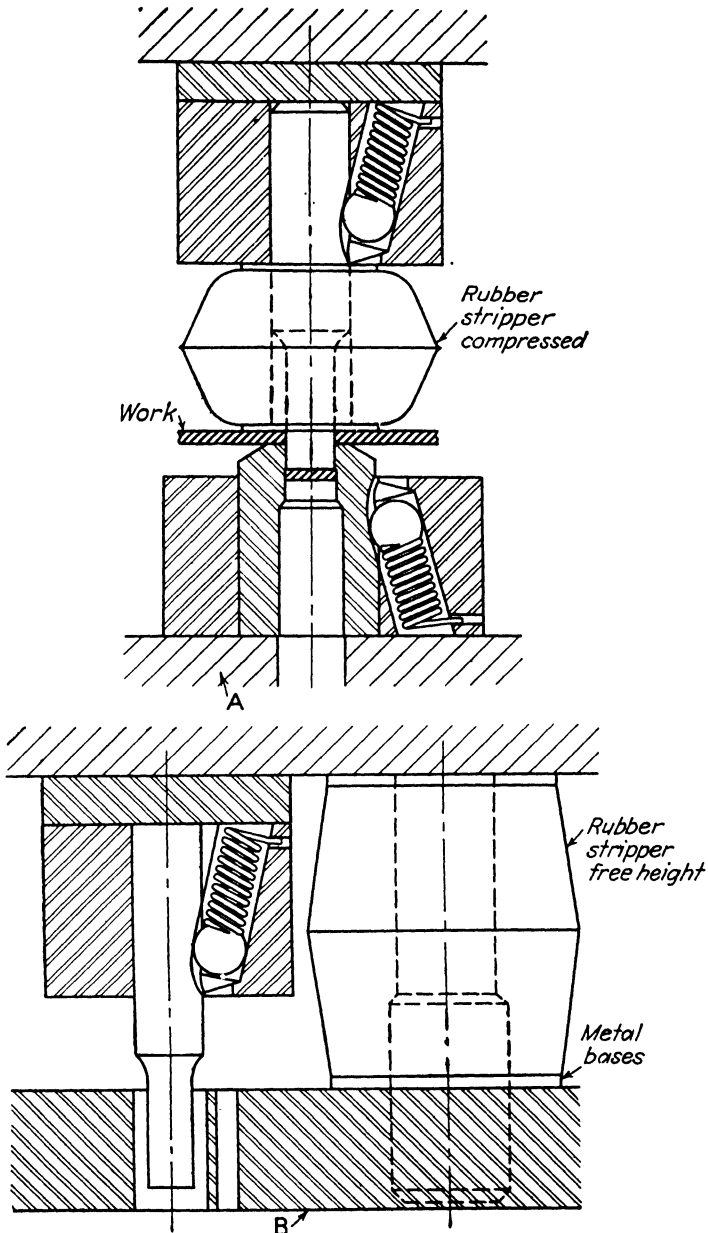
Rubber stripper shown at A eliminates the installing of a costly stripper plate, the mounting of shoulder screws and springs, and the drilling, counterboring, and tapping of holes or the drilling of pockets for coiled springs. At B, rubber strippers are mounted where the die-set thickness is not sufficient to permit the drilling of spring pockets or, between punch holder and stripper plates, where a low-shut height of the die is required. (Courtesy of Richard Brothers, Division of Allied Products Corporation.)
